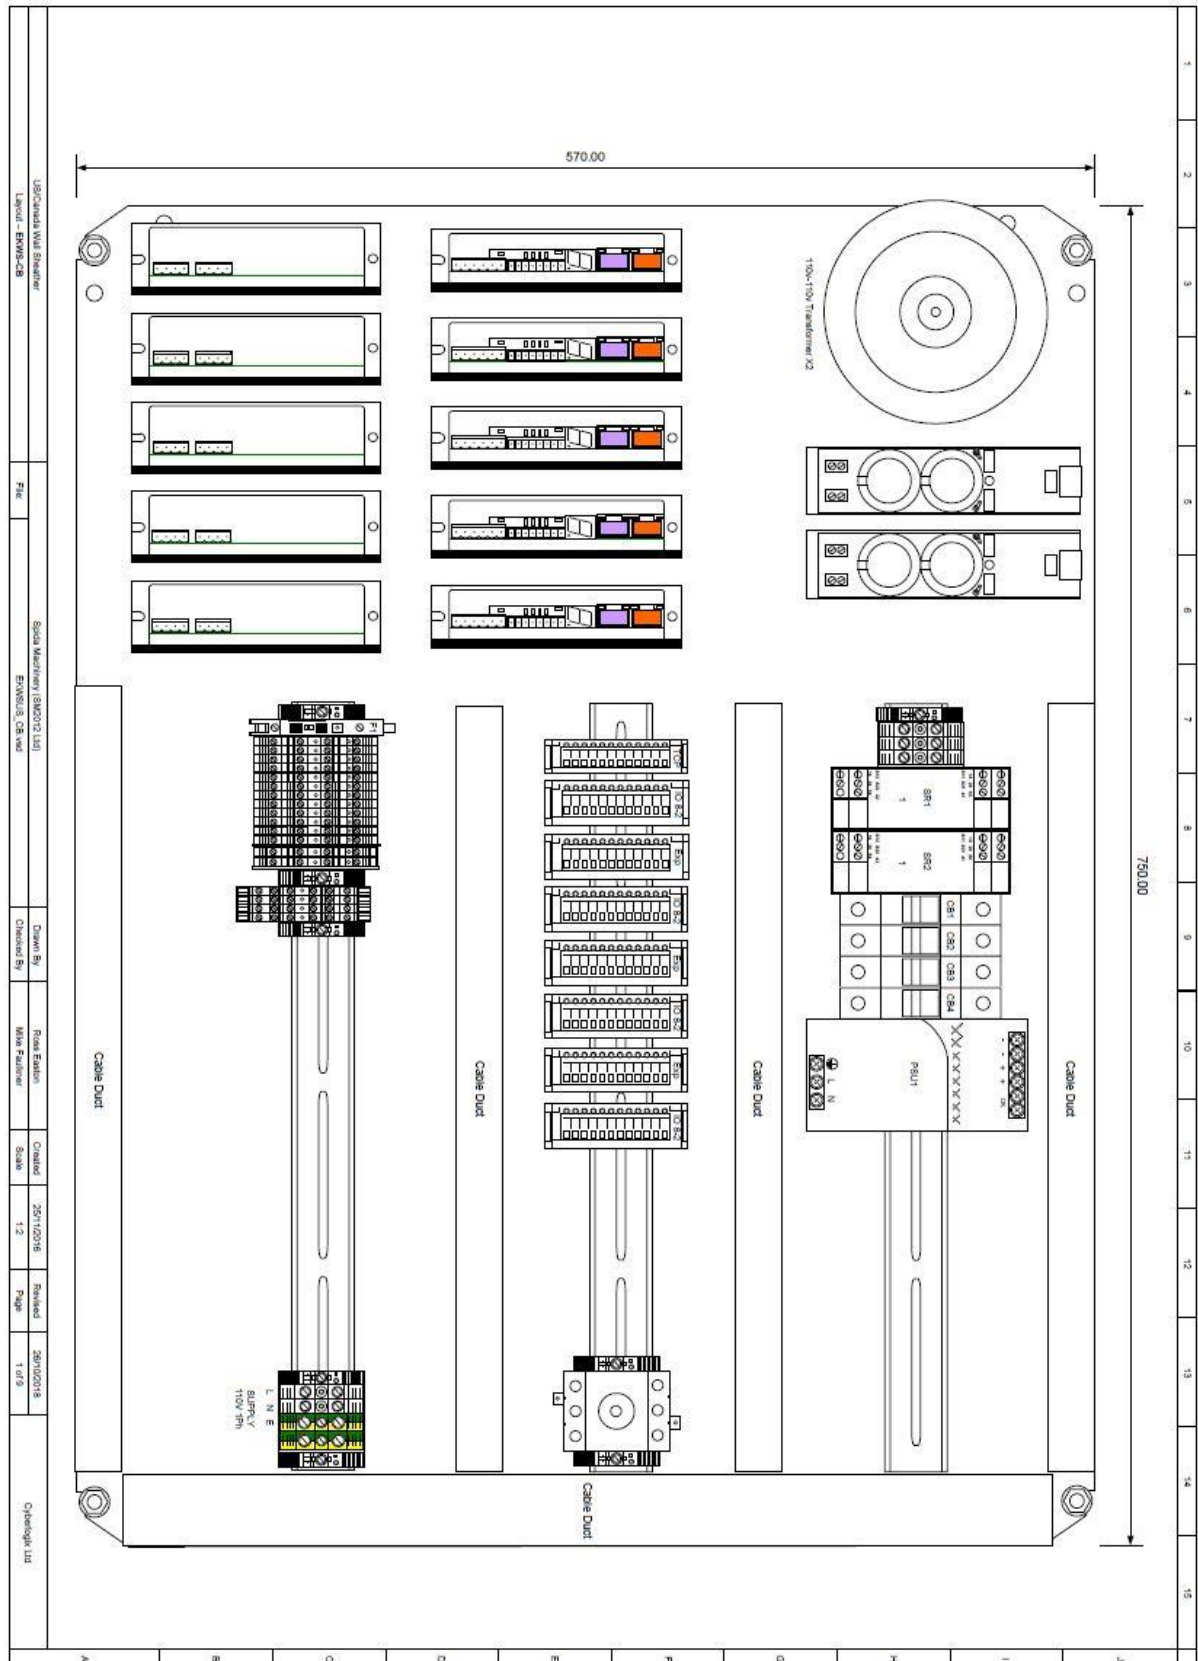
, Spida Auto Sheather Electrical Drawings US/Canada part 1
